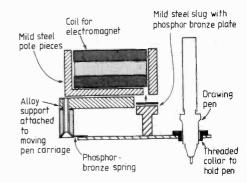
Cross-section of pen lifting mechanism. More than one can be used to provide different coloured pens.
